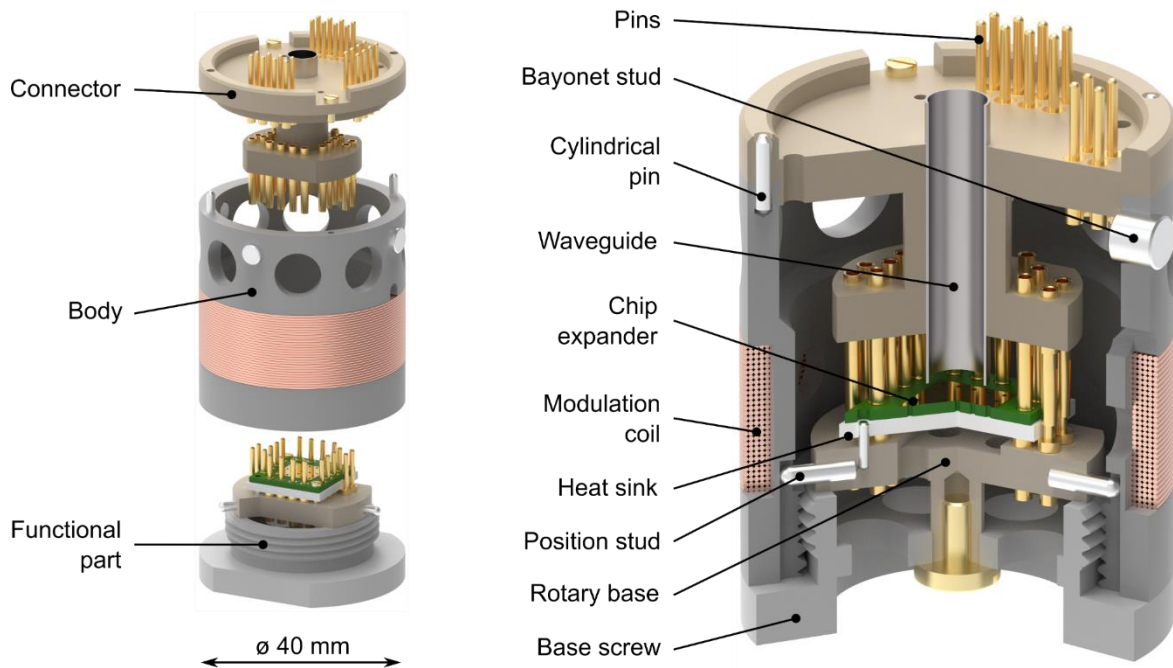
Design of chip sample holder – disassembled into the main parts (on the left) and sectional view containing annotations of all parts (on the right).
